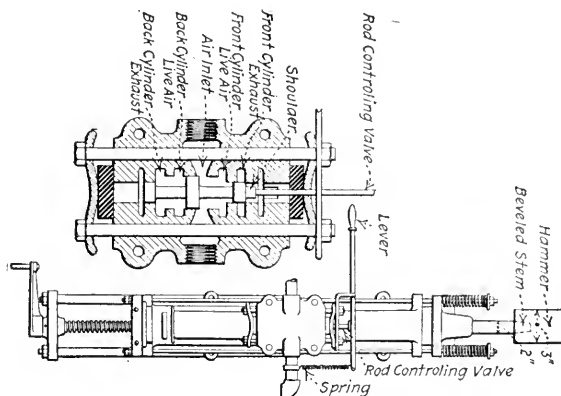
ARRANGEMENT OF HAMMER AND VALVE.
